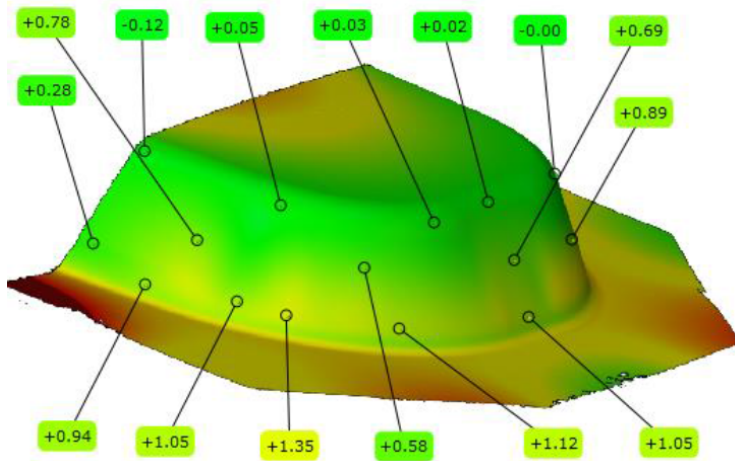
Shape deviation for a part deep drawn using the optimised blank holder stiffness (drawing depth of 70 mm; applied blank holder force of 1,000 kN)
